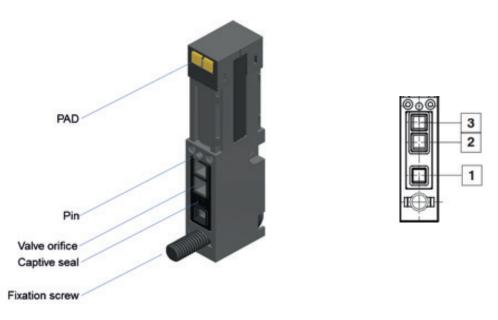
FLEXISOL for manifold mounting with electrical PAD connection (left). Port numbering (right).
